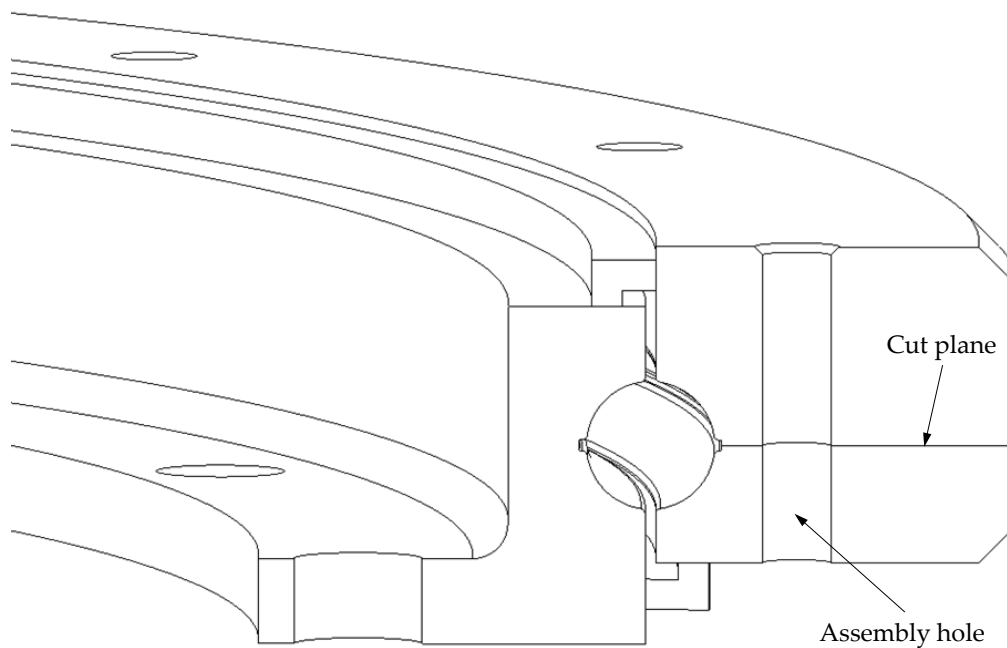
Representation of the assembly hole and cut plane of a slewing bearing.
